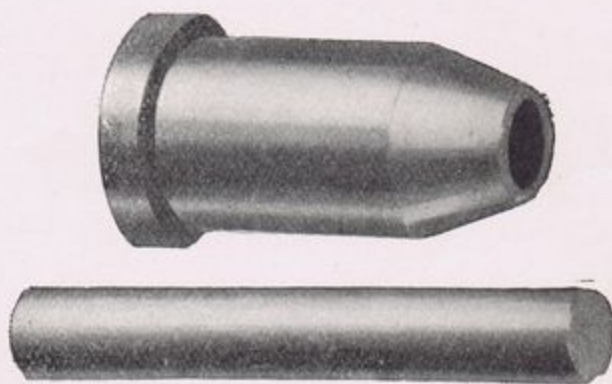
TAPPET AND TAPPET GUIDE ON 500 C.C. AND 600 C.C. S.V. ENGINES
